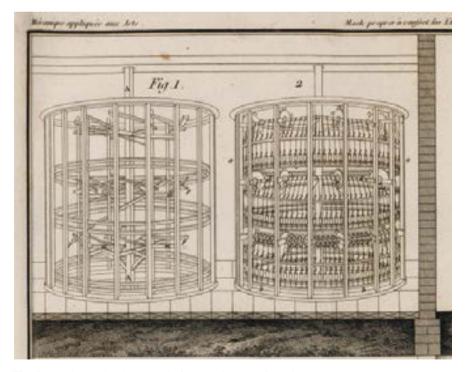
Machine design by Borgnis for a textile manufacturing system
